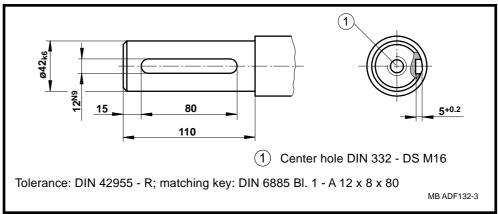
Main spindle motor ADF 132 - output shaft with key
